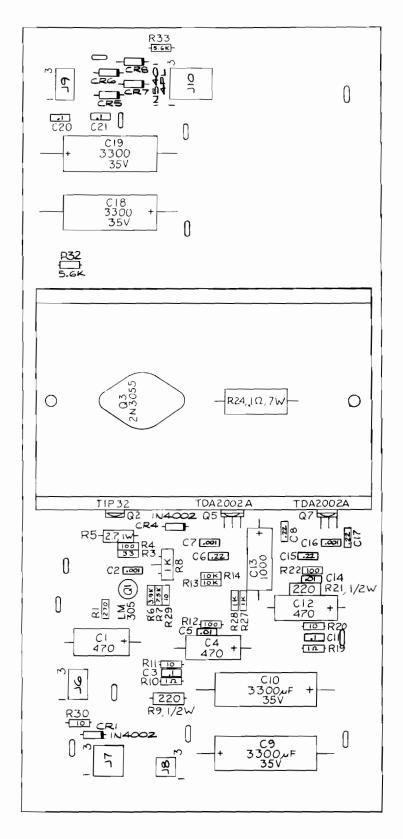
Regulator/Audio II PCB Assembly A035435-04 K
